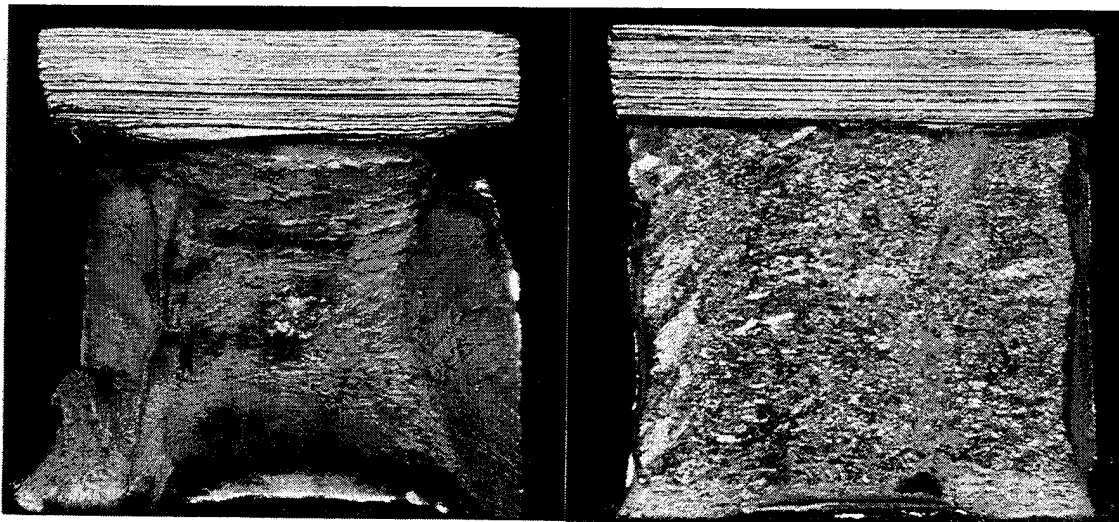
MV20 Ductile and Brittle Fracture Surfaces (6.4 x)
